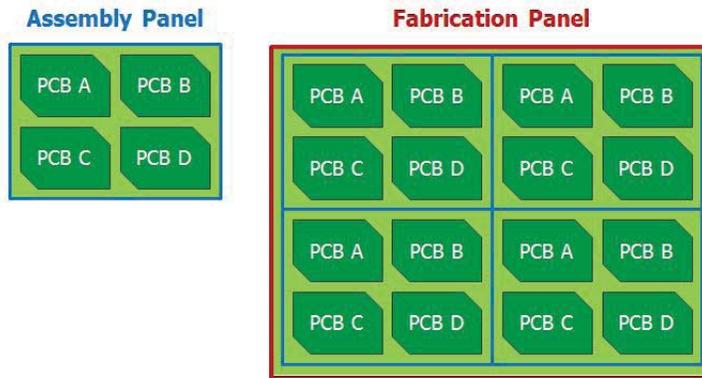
In actual fabrication, the assembly panel is made four-to-a-set on the fabrication panel, which is then separated into individual boards.
